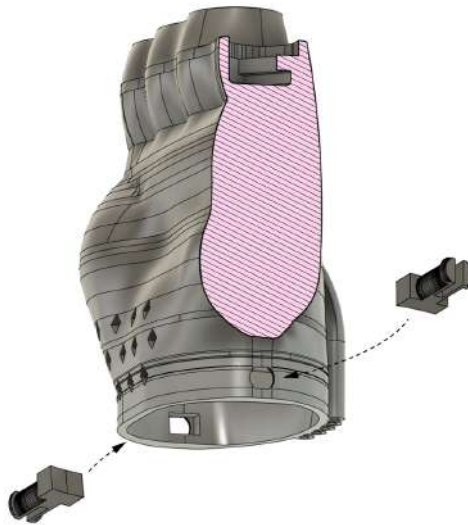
Design of the metacarpal region and thermo pins of the third prosthesis: the sectional cut shows the absence of the chamber that mimics metacarpophalangeal joints.
